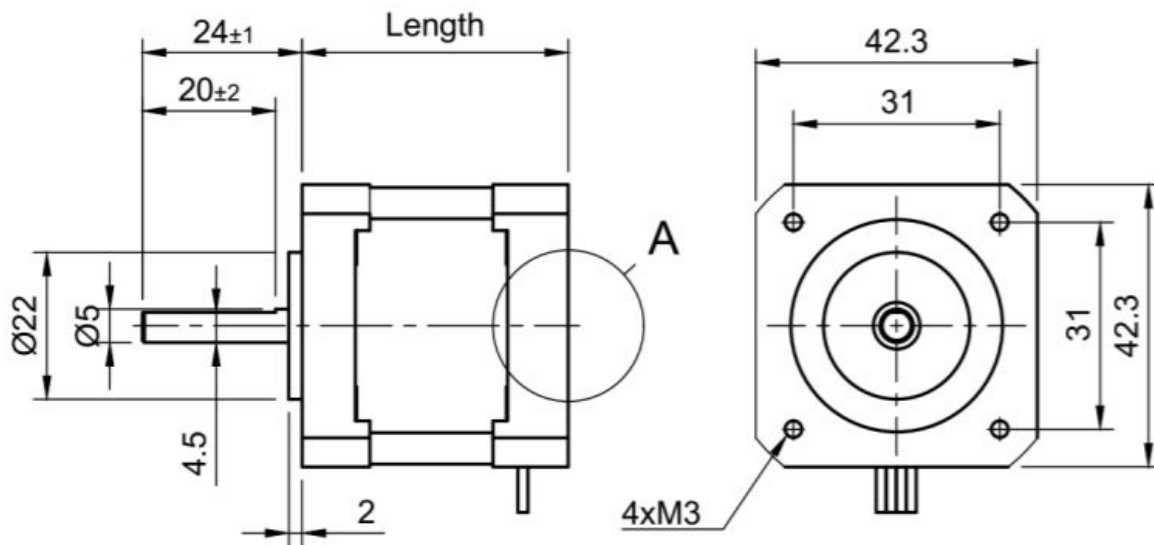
NEMA17 / 42mm stepper motor (all dimensions in mm)
